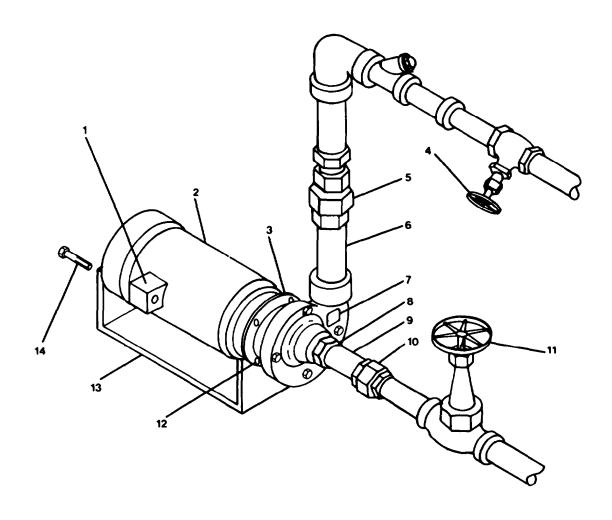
Pump Assembly (Fresh Water Booster).
